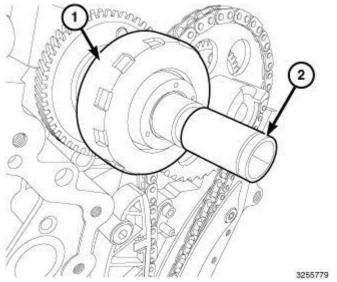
Oil Separator & Oil Separator Remover/Installer Tool Courtesy of CHRYSLER GROUP, LLC
